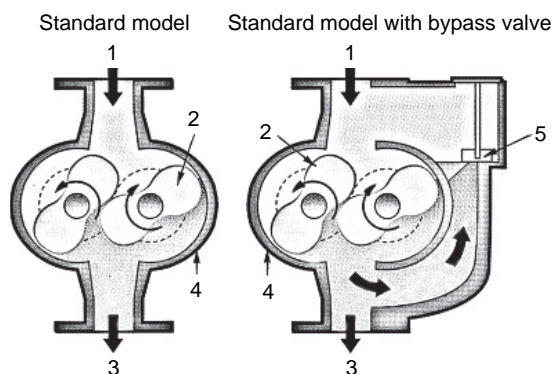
Scheme of a Roots pump. Main components: 1, inlet; 2, two-lobe piston; 3, exhaust; 4, pump casing; 5, bypass valve.
